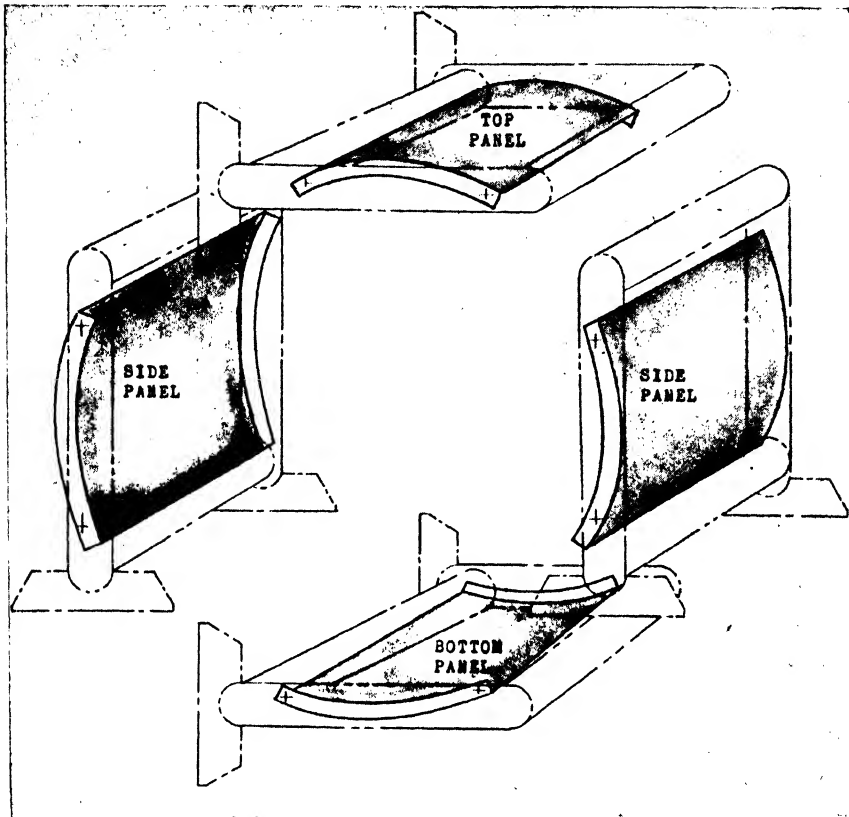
Parts of a Fuselage Section in Picture-frame Fixtures.
